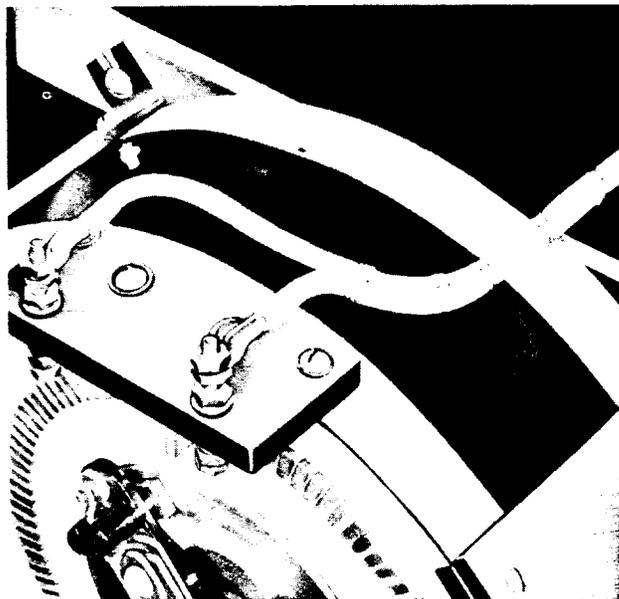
Rheostats — Motor Driven and Large Manual — Wire Larger Than No. 14 Gauge
